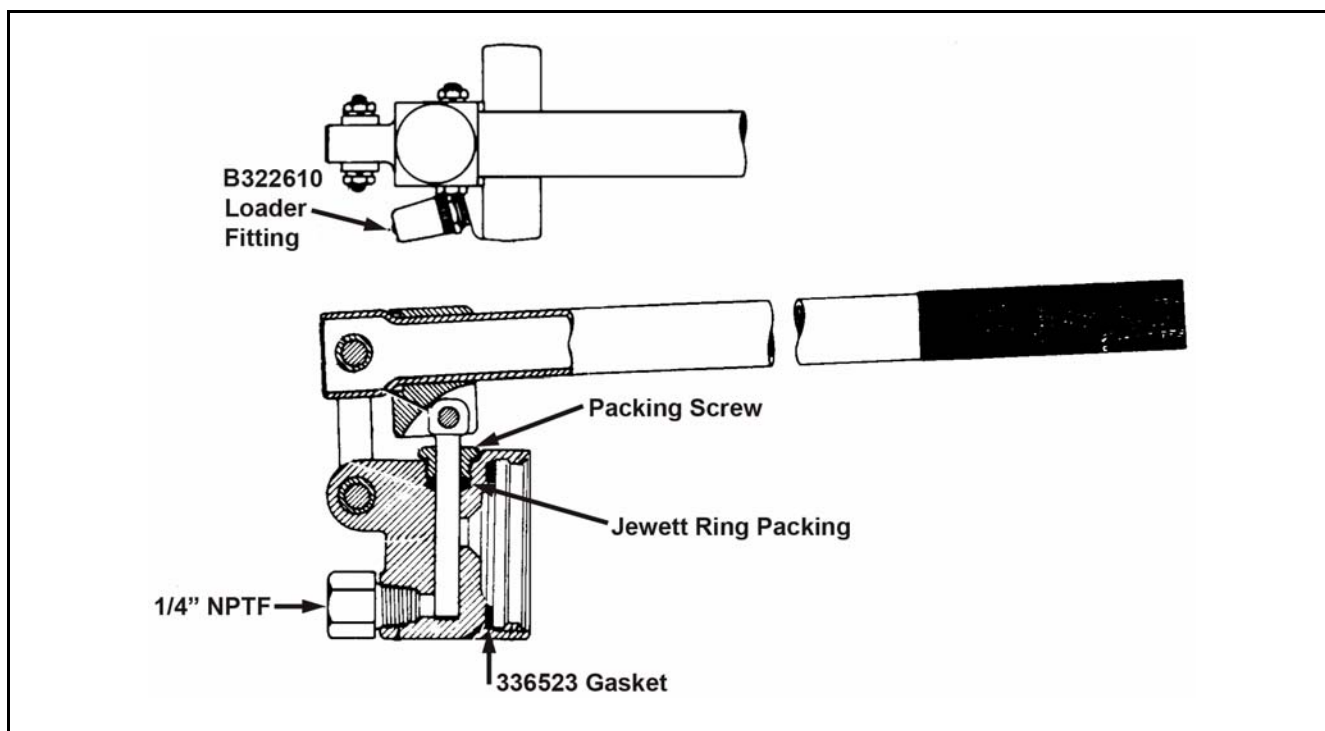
Head Assembly for Models 6243-J3 and 6679-J3 Guns
